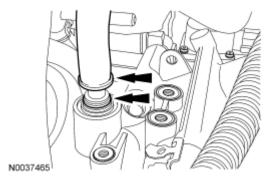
Locating Crankcase Vent Tube Courtesy of FORD MOTOR CO.
